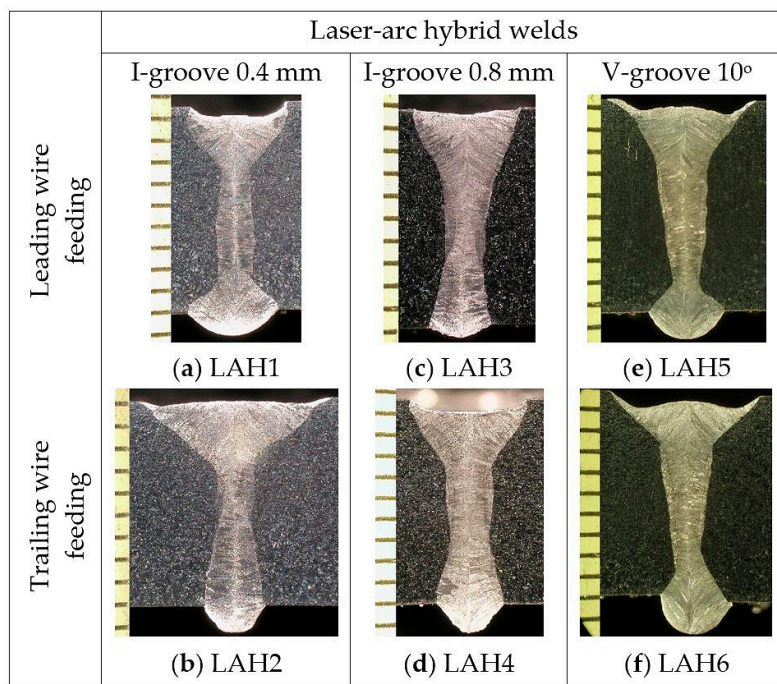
Weld cross-sections (a–f) from laser-arc hybrid welding tests.
